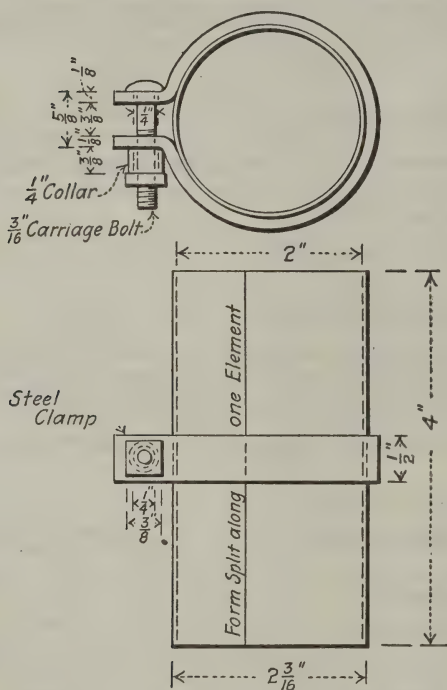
Details for 2 by 4-in. Cylinder Form.
